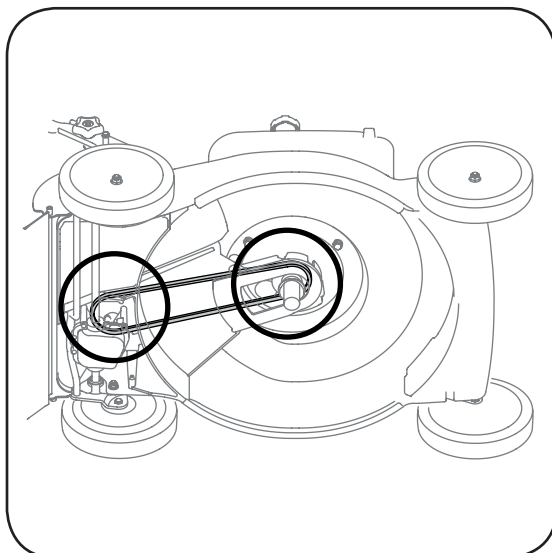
REMOVE BELT FROM TRANSMISSION AND ENGINE PULLEY
